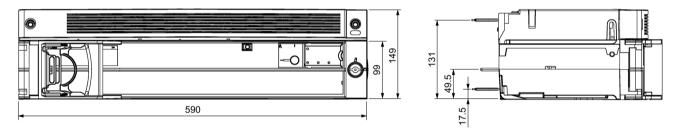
3NJ63 switch disconnector size 1, 4-pole, with motorized operating mechanism
